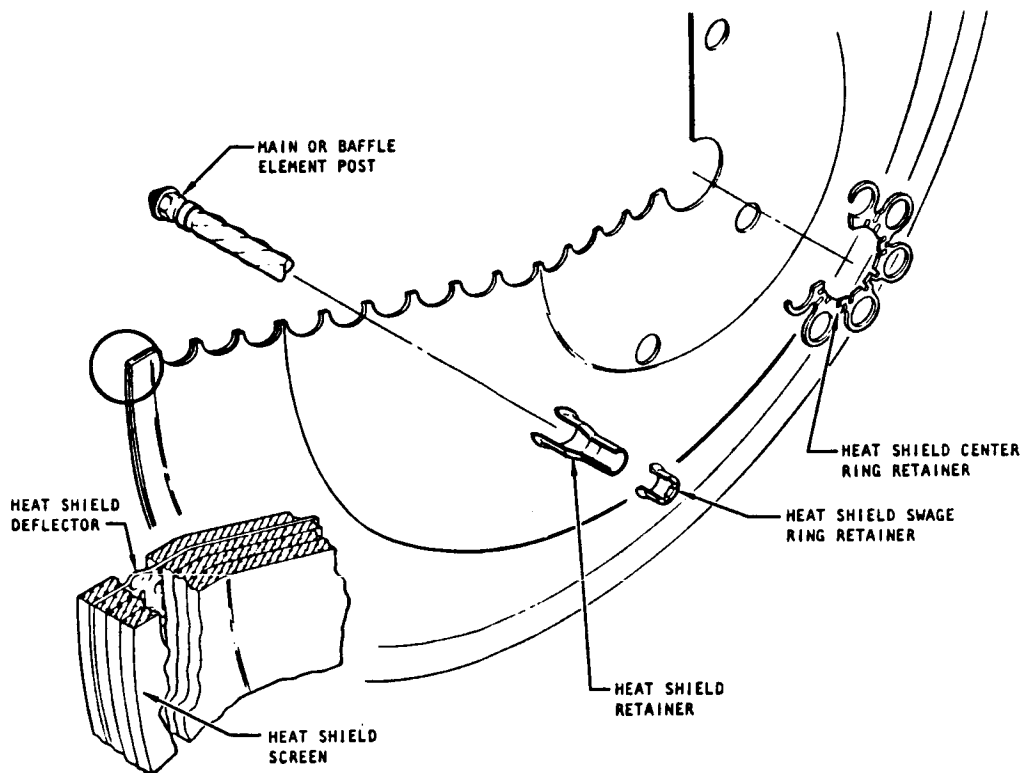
EXPLODED VIEW OF HEAT SHIELD ASSEMBLY (RS009142)
